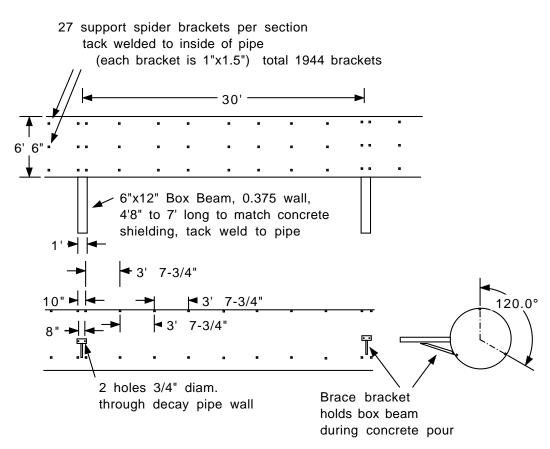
Locations for welding support brackets inside decay pipe.
